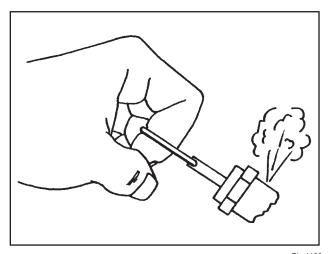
Checking Pressure Relief Valves<sup>Pix 1160</sup> & Relieving System Pressure
